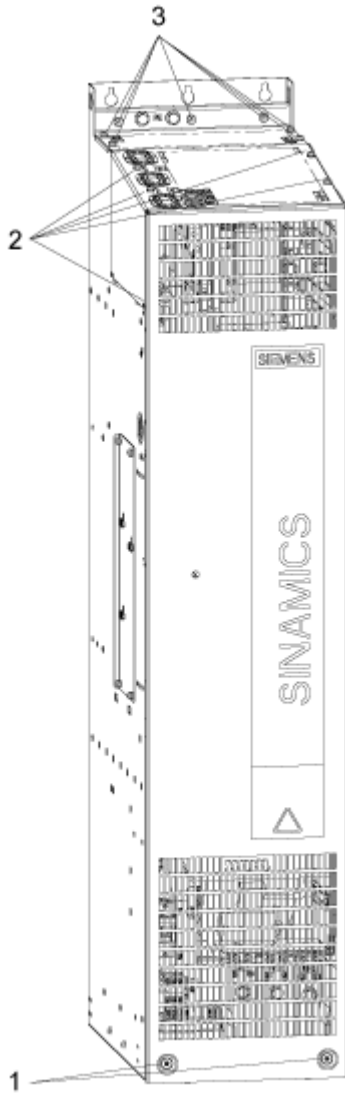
Installing the Braking Module in a Power Module frame size GX – steps 1 - 3
